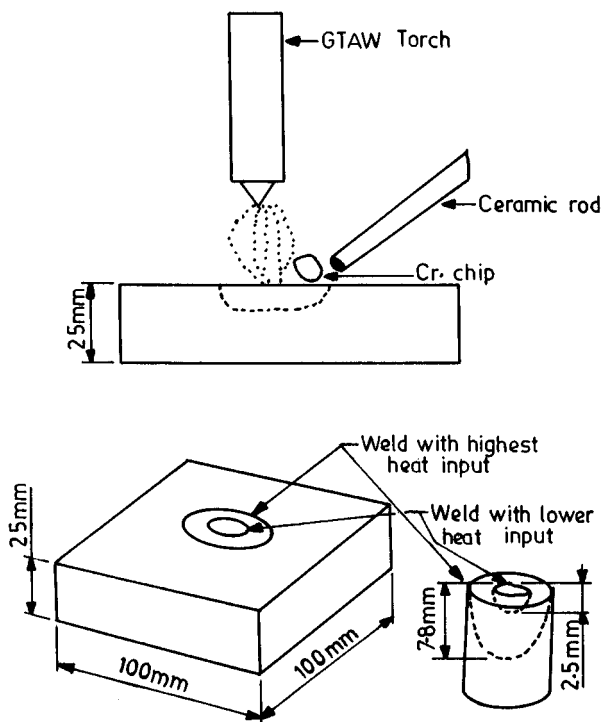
Representation of the stationary arc TIG (SATIG) welding by adding Cr chips (upper picture) A316 ss weld pad showing the location of the weld metal and the machined weld metal (lower picture).
